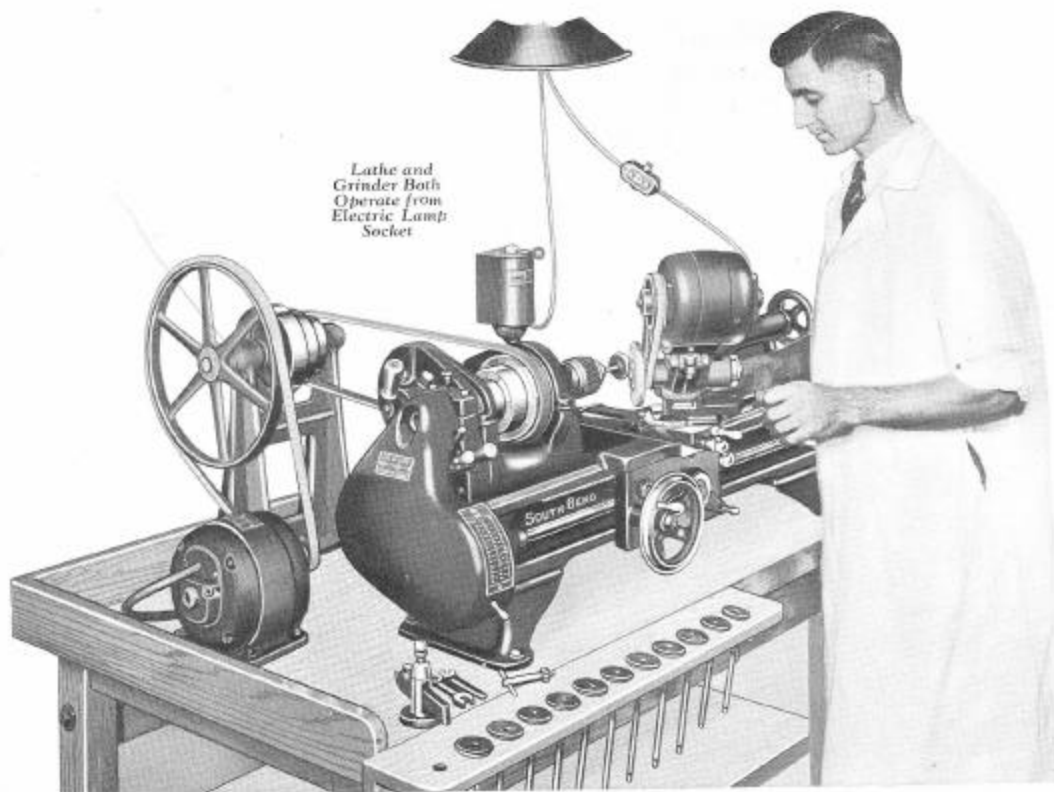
Grinding a Valve in the New 9-inch Junior South Bend Electric Valve Grinding Lathe.
